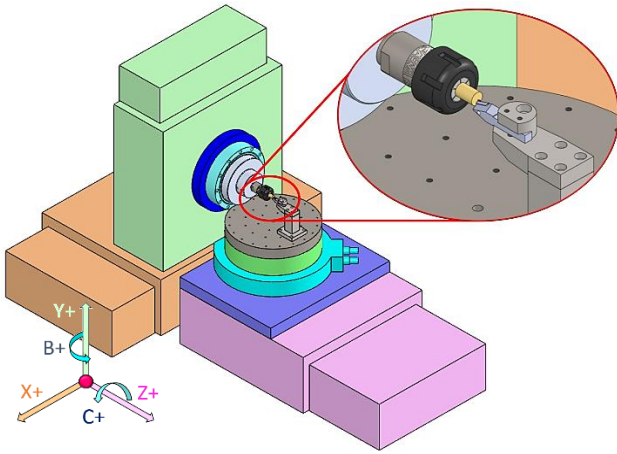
Setup of the tool and workpiece for the diamond skiving process, with the tool rake facing the X- direction.
